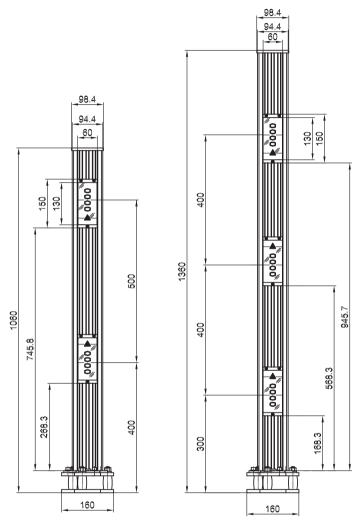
Dimensions for deflecting mirror columns for 2 and 3 beams UMC-1002 and UMC-1303
